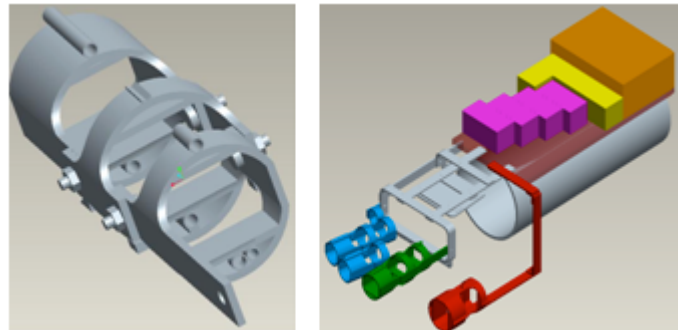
(a) Band design common to digits. (b) Assembly of hand/forearm.
